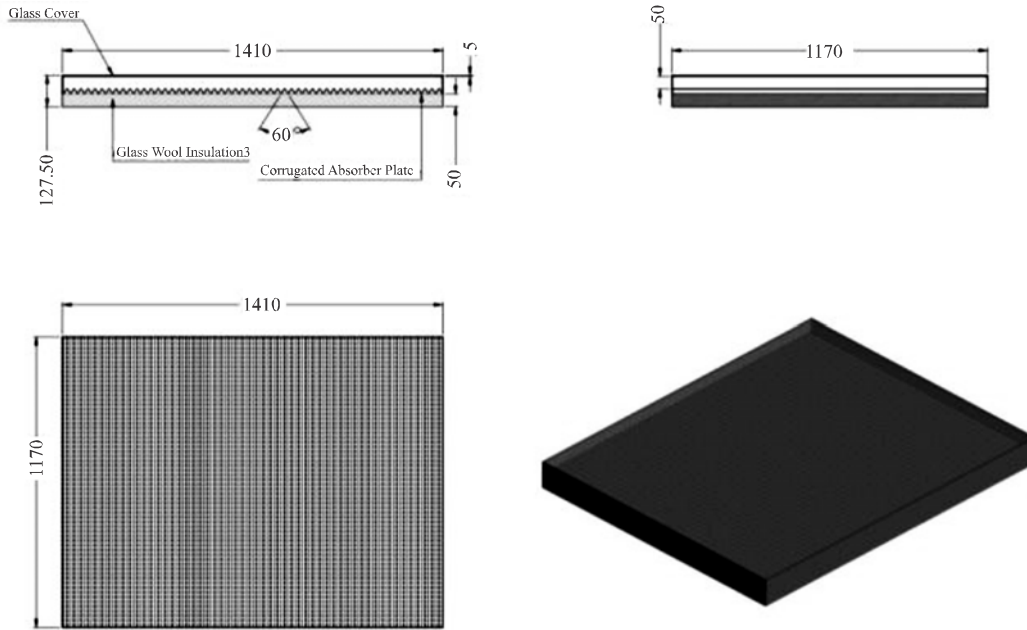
SECTIONAL VIEW OF THE FLAT PLAT COLLECTOR (ALL DIMENSIONS ARE IN MM)
